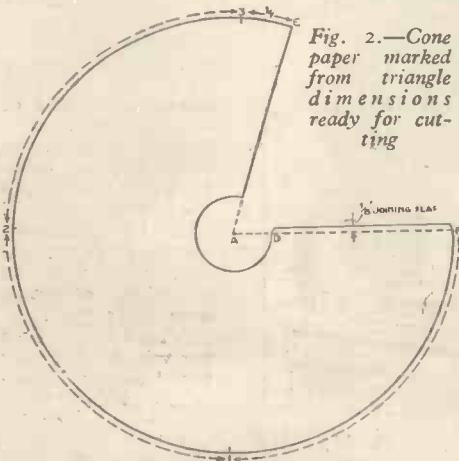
Cone paper marked from triangle dimensions ready for cutting
